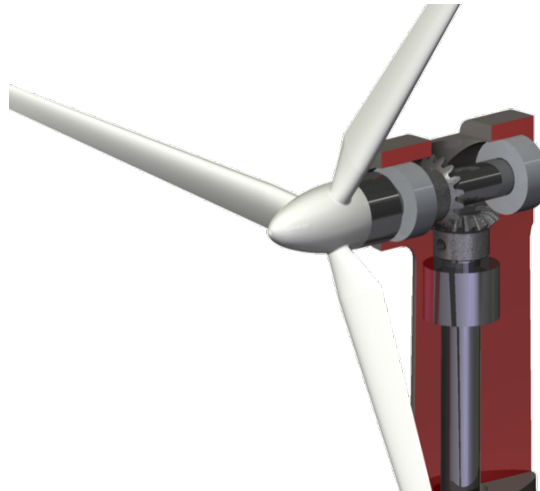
Cut-away computer rendering of the gearbox during the design phase. Rotor geometry shown for reference.
